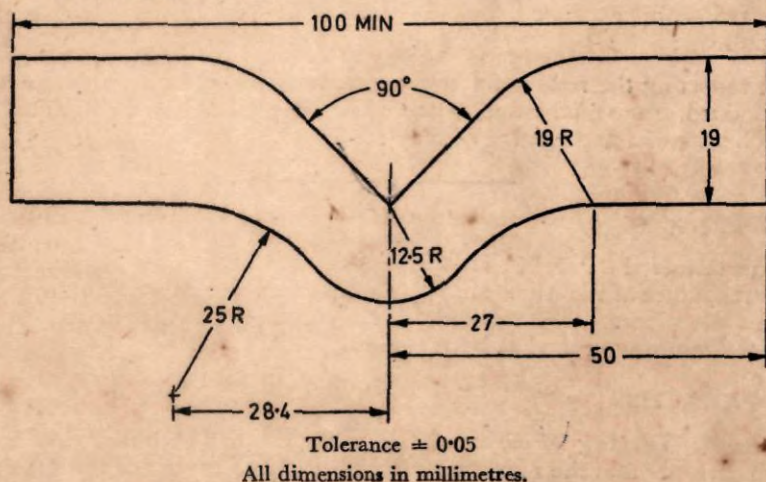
DIES FOR TEAR TEST SPECIMENS
